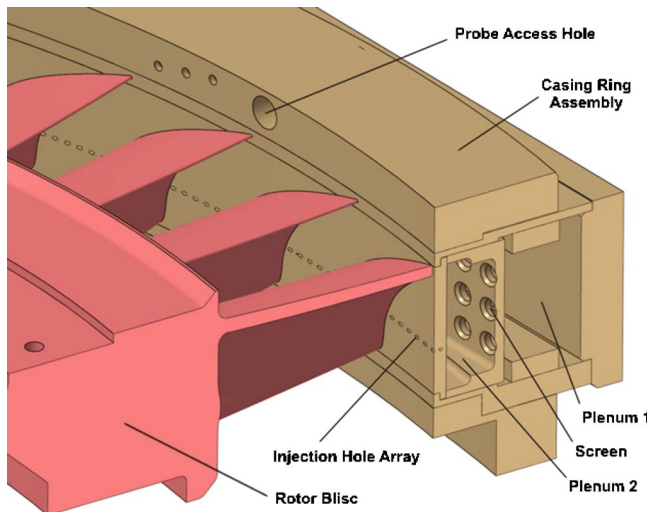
Air injection system and probe access within traversable rotor casing ring assembly
